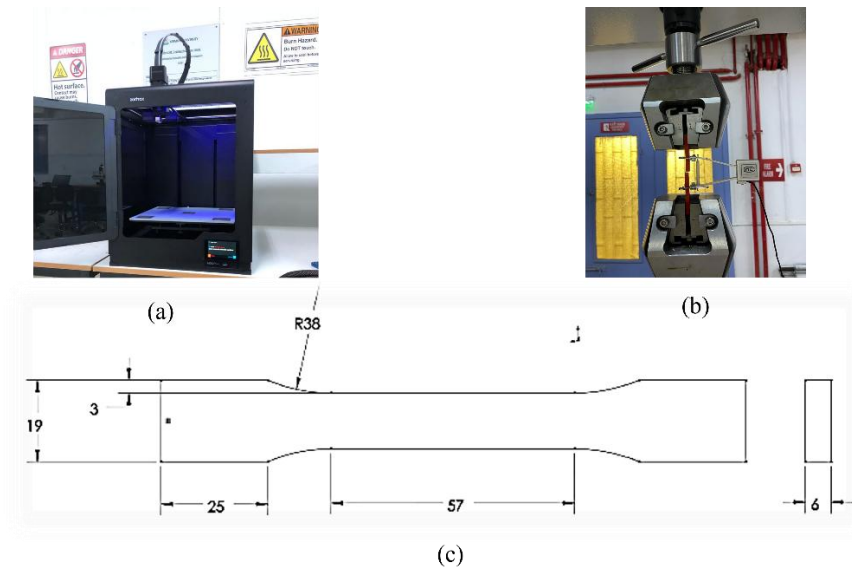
Experimental setup: (a) Zortrax M300 plus printer (b) Tensile testing machine (c) Standard specimen [15]; all dimensions in mm
